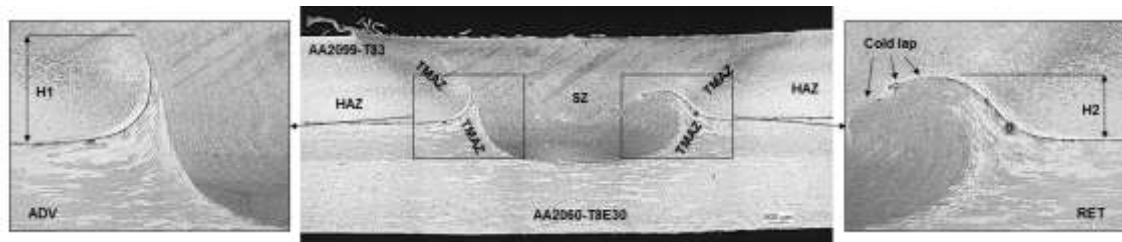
Cross-section of FSLW joint produced at 1200 rpm and 250 mm/min using a conventional threaded tool.
